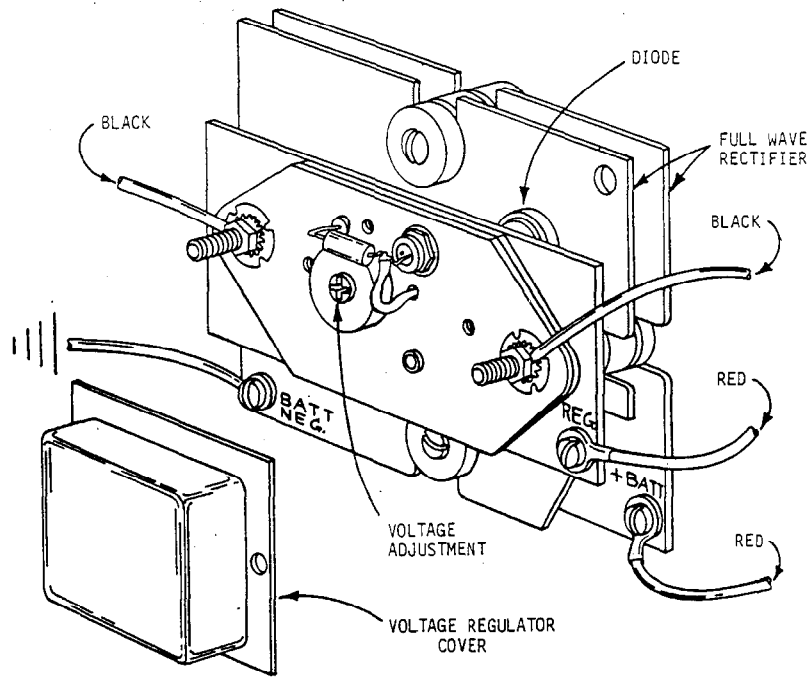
RECTIFIER - REGULATOR ASSEMBLY
